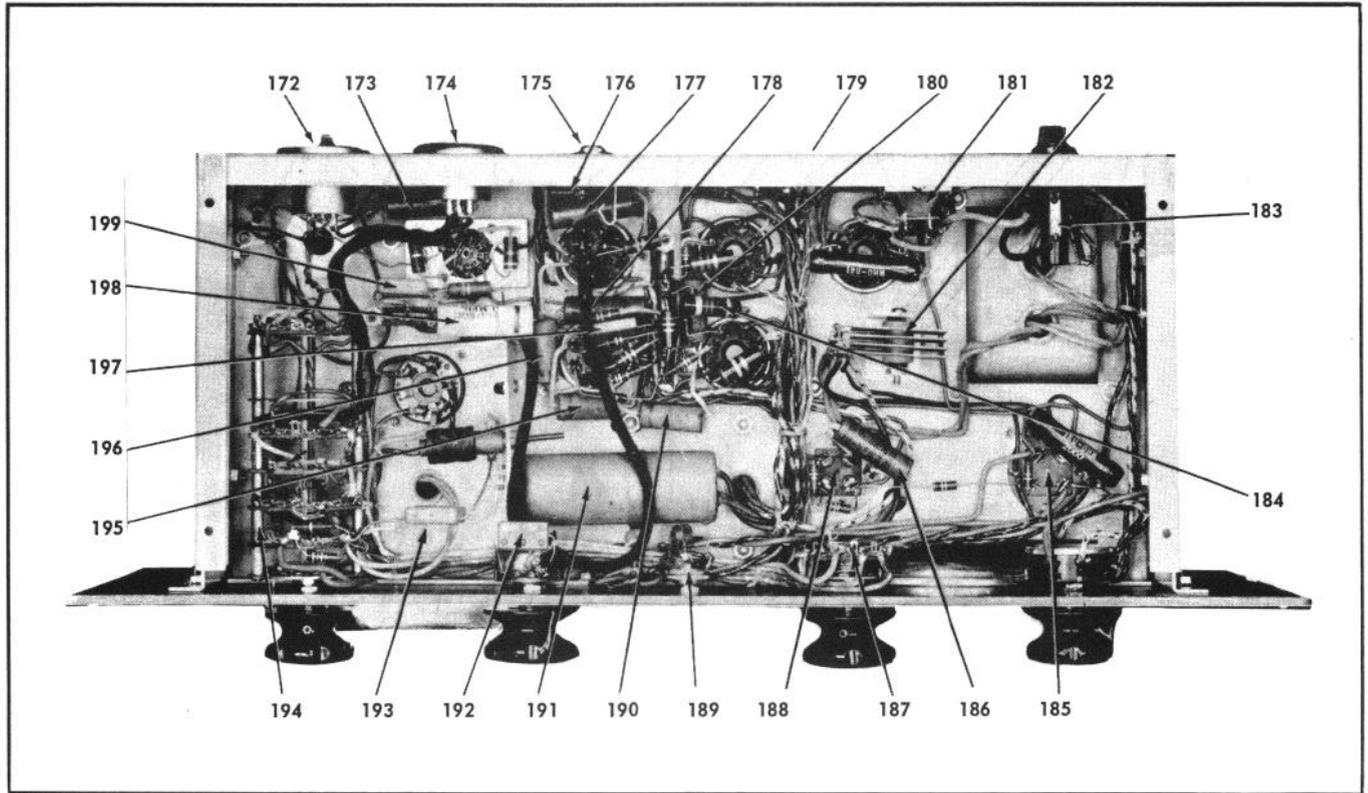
Bottom View of PT6-6J Amplifier Chassis.
